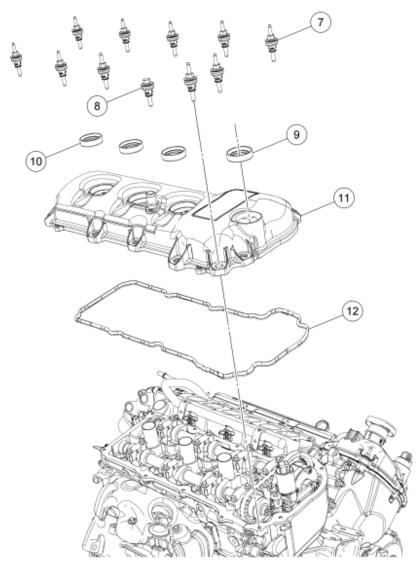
Identifying Valve Cover - RH Courtesy of FORD MOTOR CO.
